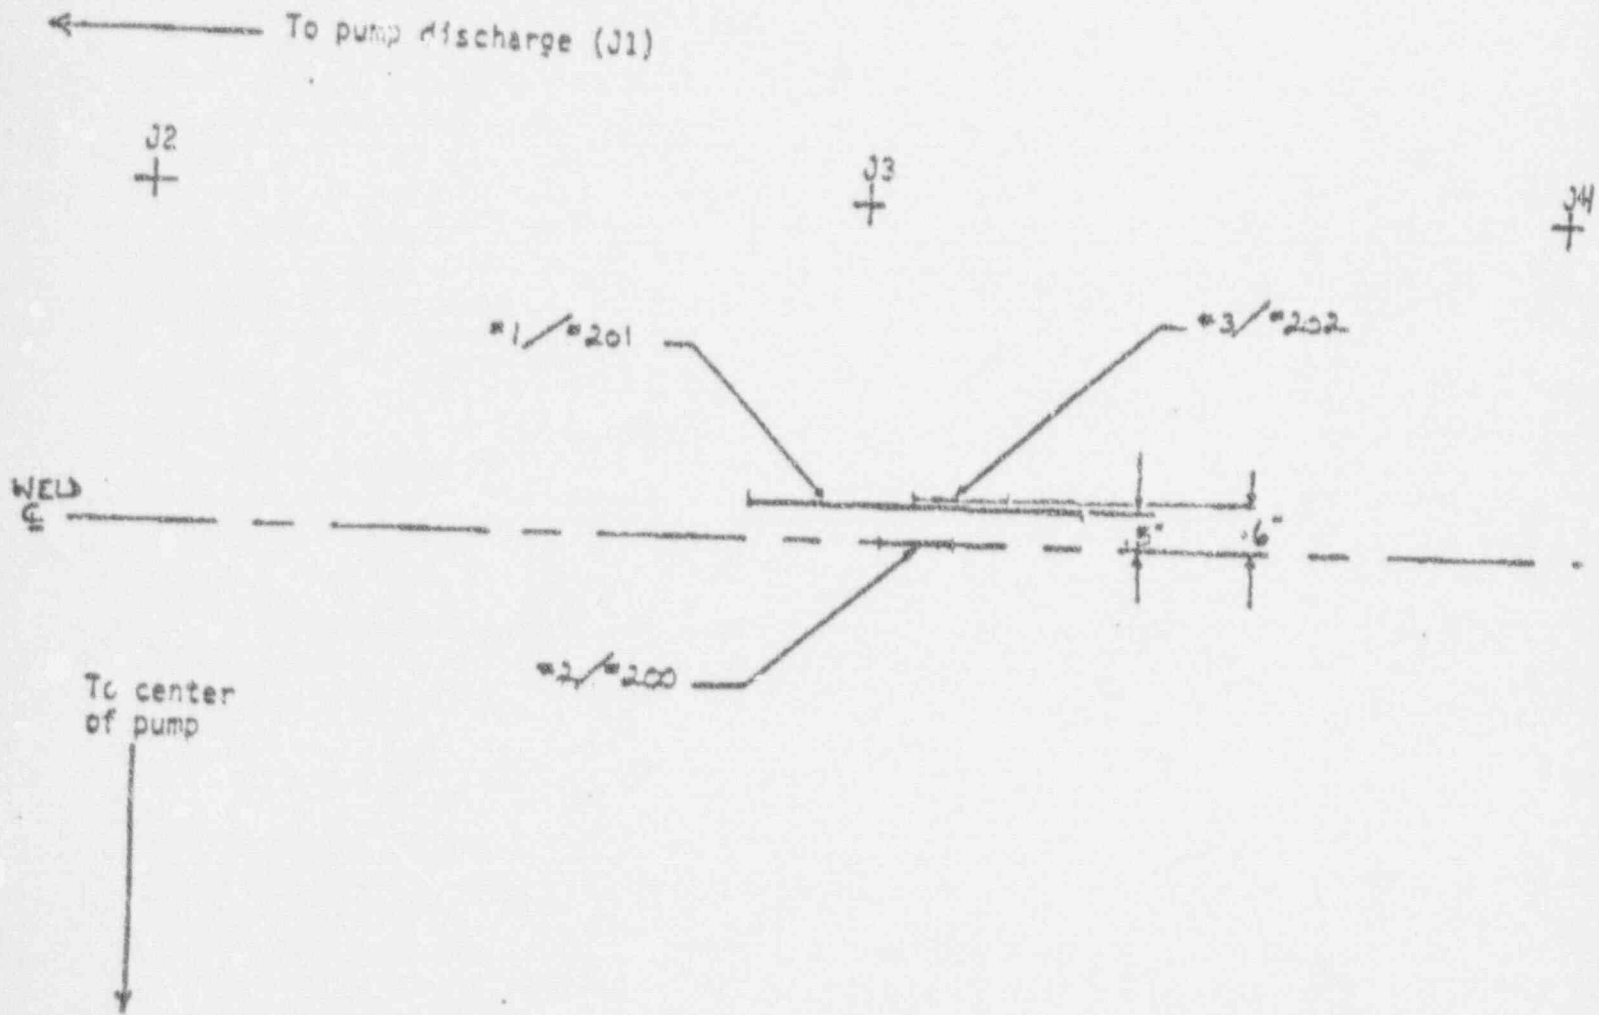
ANO-1 1988 UT Exam of "B" RCP Upper Scroll Weld Indication Plan View
